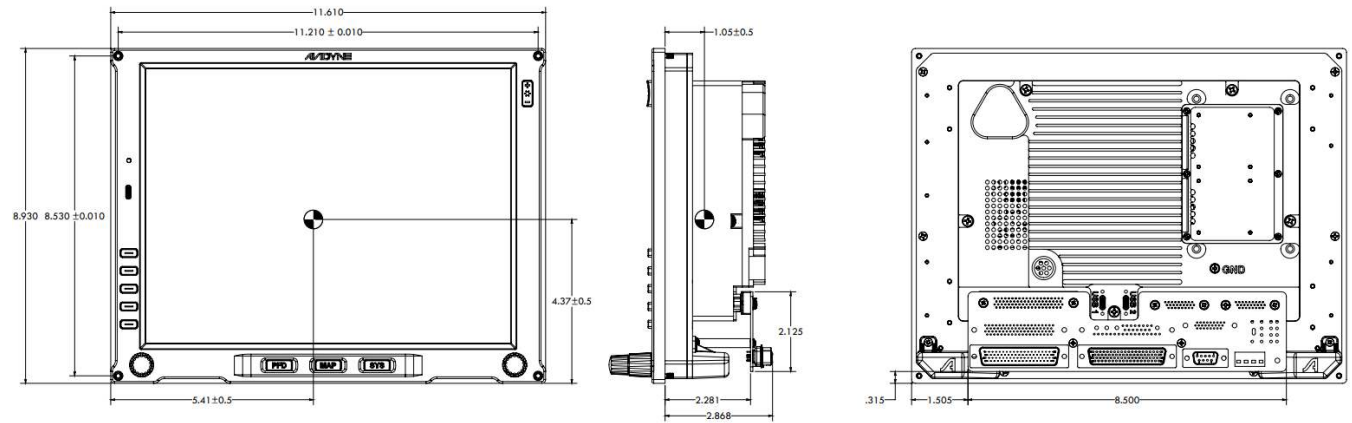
Vantage12 MFD with EZ Adapter (Single ADC Installations)
